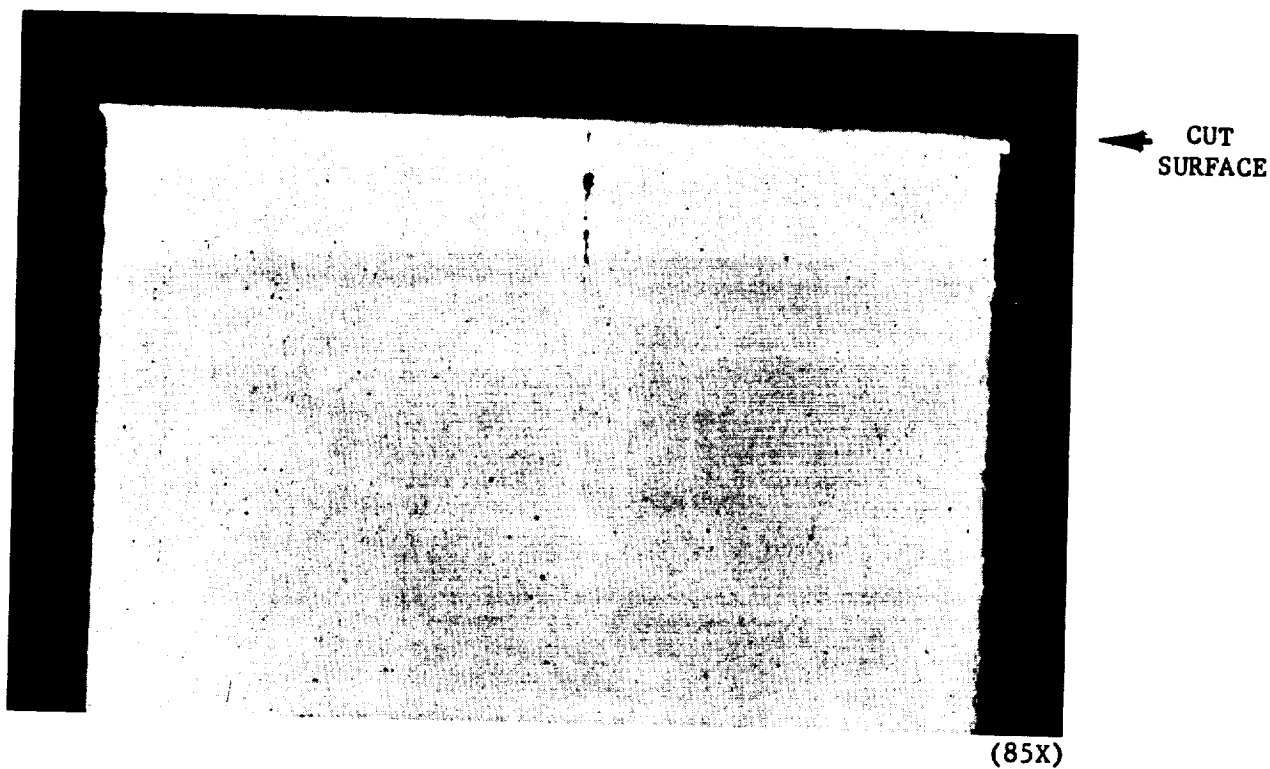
CROSS-SECTION OF SURFACE CUT DRY ON ABRASIVE WHEEL.
